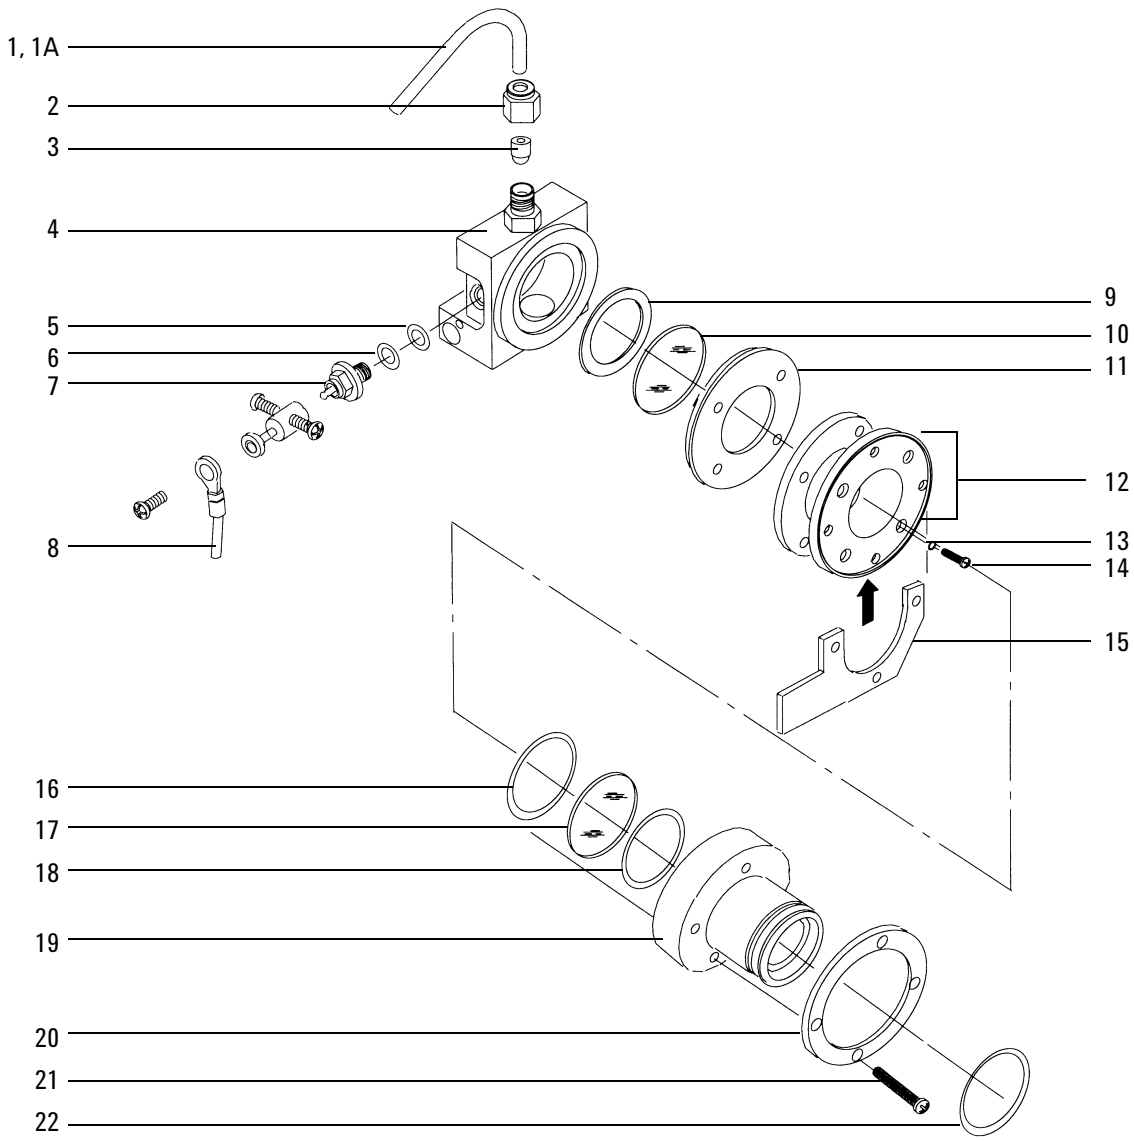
Exploded diagram of the Flame Photometric Detector
